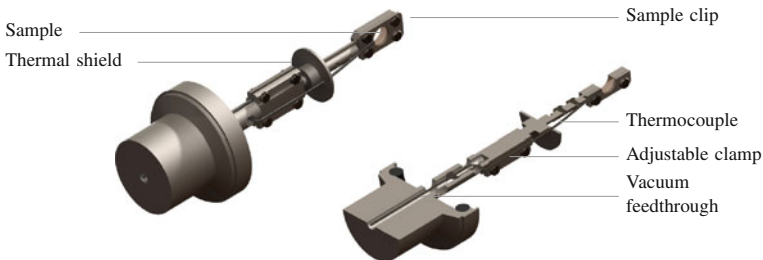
Full and cross-section CAD view of the sample holder for high-temperature measurements
